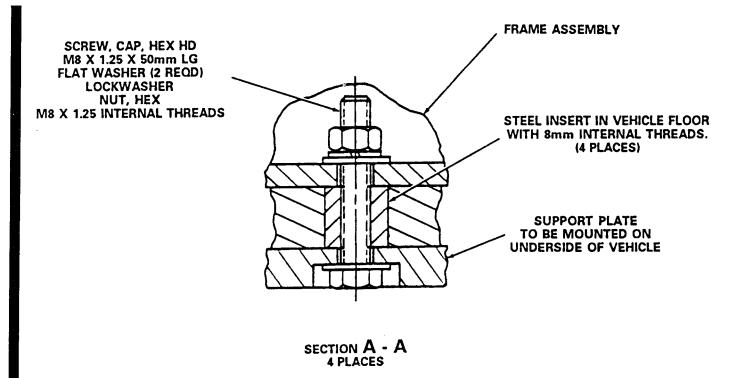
Frame Assembly Installation (Sheet 1 of 2)
